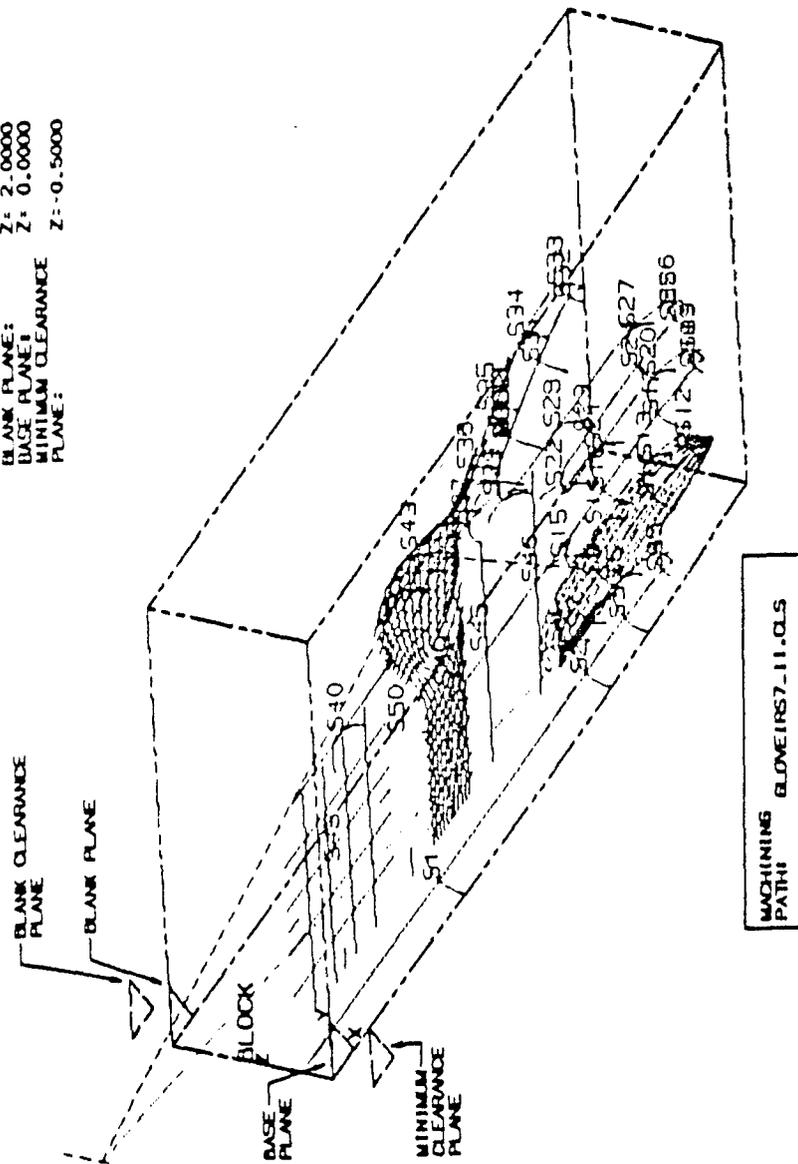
Machining Path: GLOVE1RS7\_11.CLS
